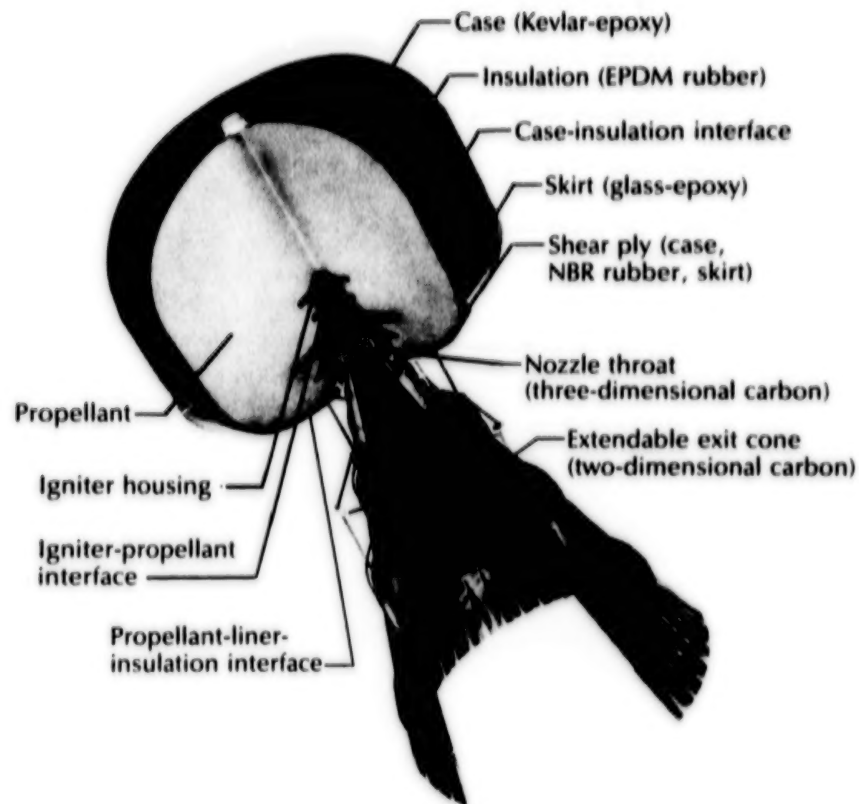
Sketch of IPSM-II motor showing examples of aging samples.
